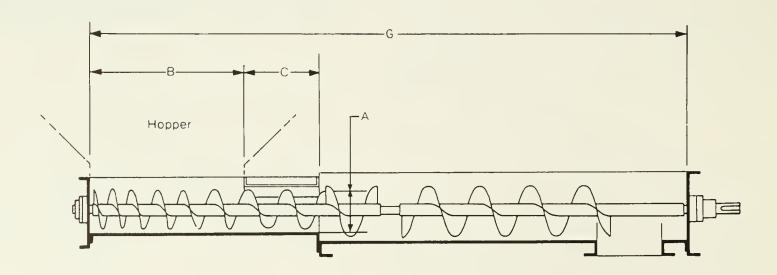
Screw feeder with extension conveyor. A, auger diameter; B, hopper length; C, choke length; G, trough length.
